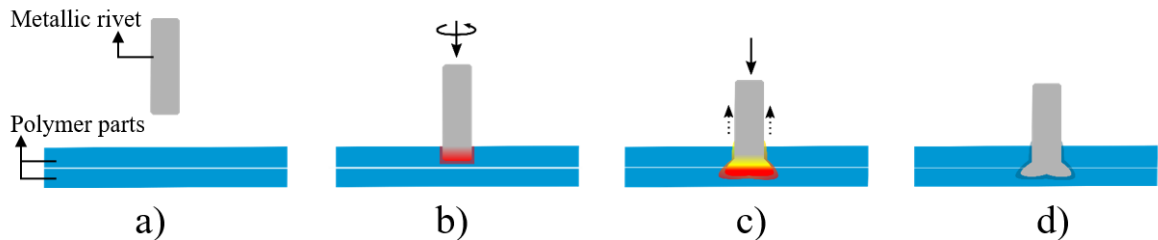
Schematic representation of Direct Friction Riveting process steps: a) positioning of the joining parts, b) friction phase (plunging of the rotating rivet through the upper part), c) forging phase (plunging of the rivet through the lower part and rivet plastic deformation), and d) joint consolidation. The flash formed during the process was not illustrated for simplification.
